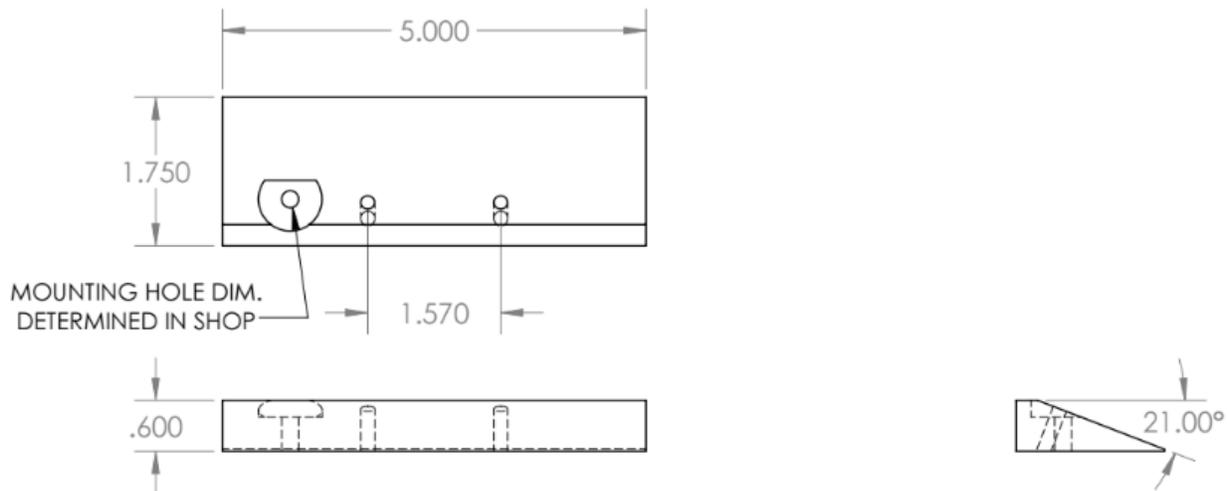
The spacer block for the NEMA 23 stepper motor to align with the gearbox on the rover.
